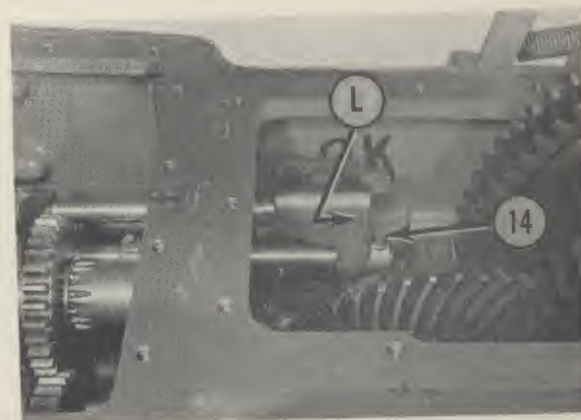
View of shifter rail lugs (L) with bull gear cover removed. Lugs can be removed without disturbing bull gear cover by working through inspection hole cover opening in bull gear cover.
